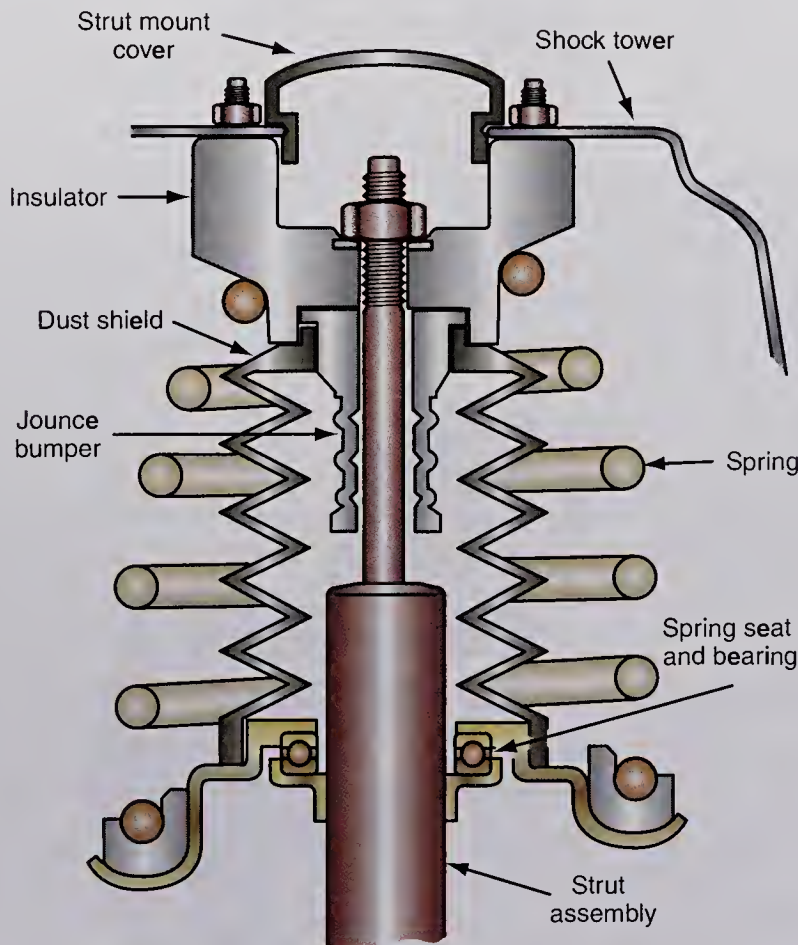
Strut assembly with bearing mounted in the lower spring seat.
